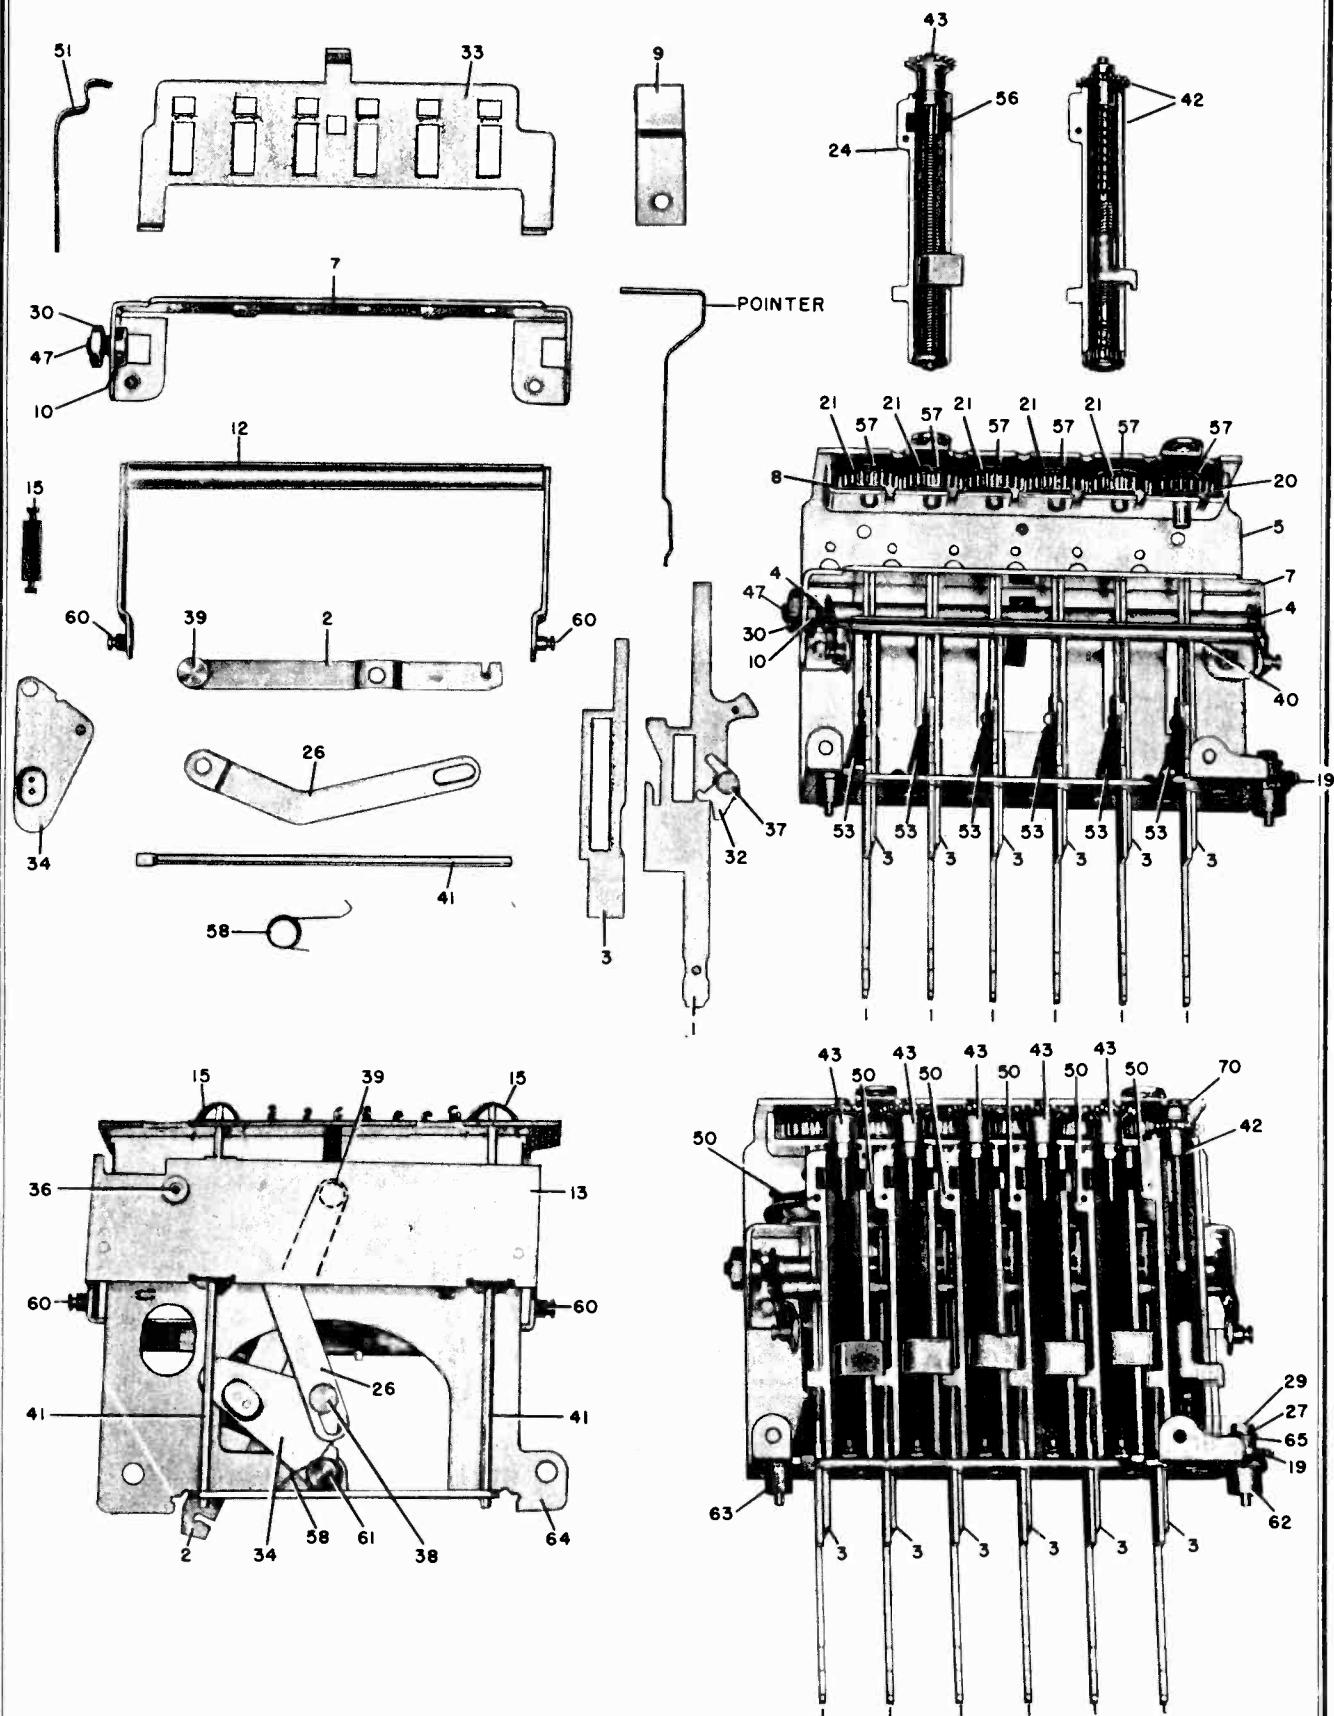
AUTOMATIC TUNER AT-58 PARTS LOCATION
